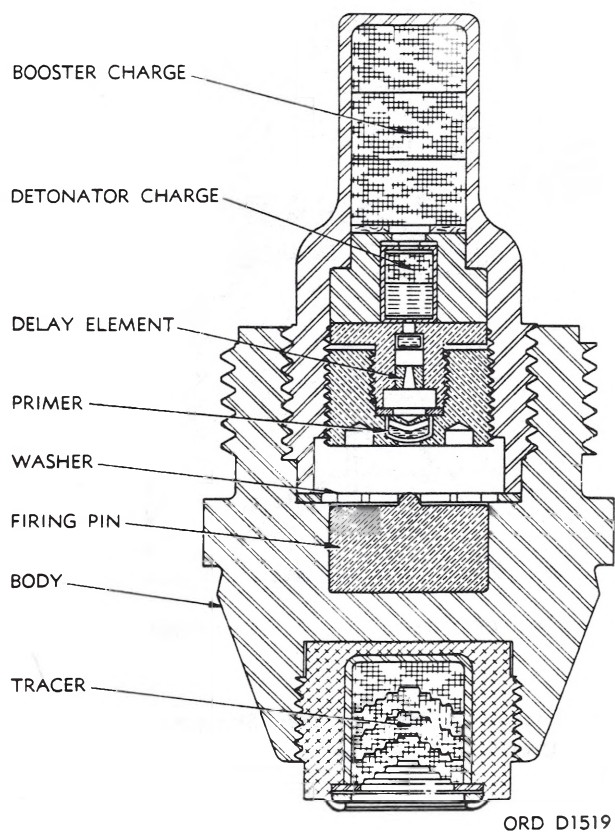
Fuze M60, Cutaway View Showing Unarmed Condition
